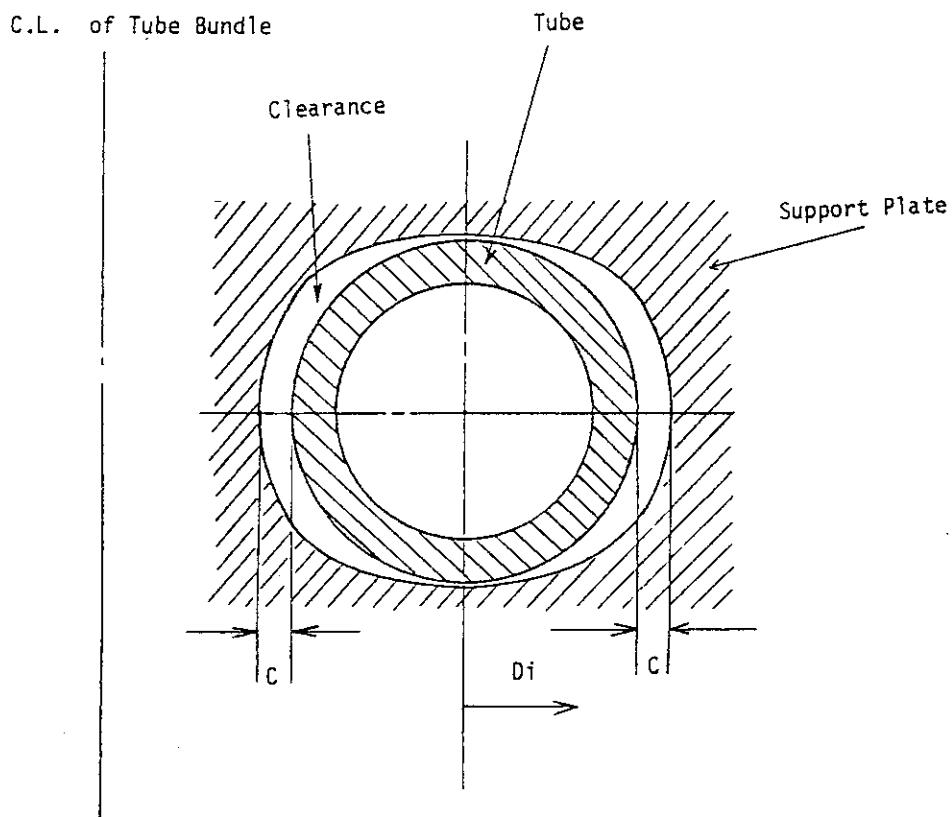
Tube-plate clearance at intersection of tube and plate
